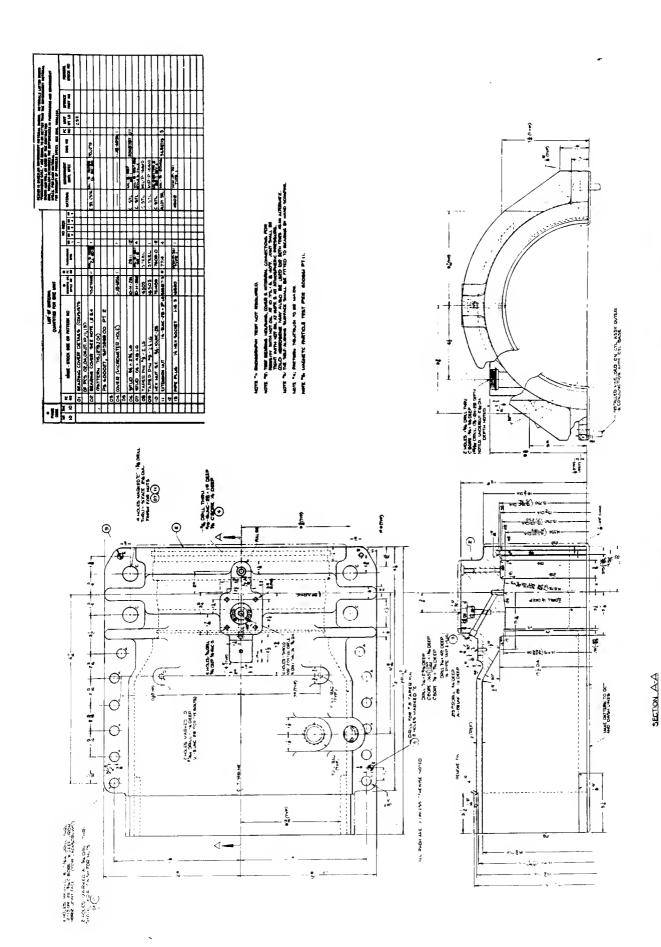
LP Turbine Coupling End Bearing Cover -- New Design.
